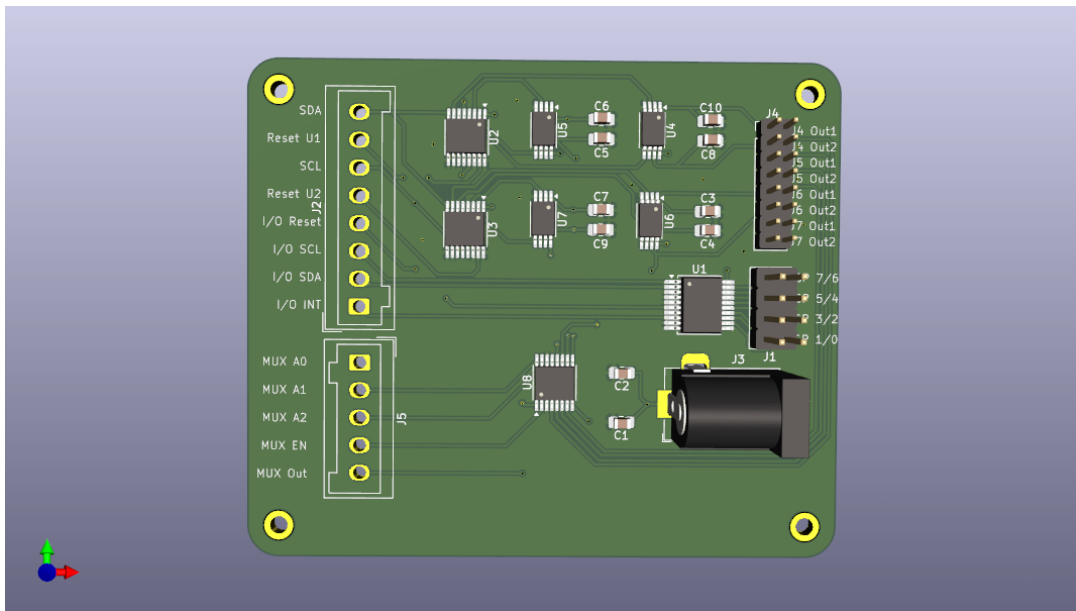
KiCAD 3D view of pre-amp DAC Driver PCB
